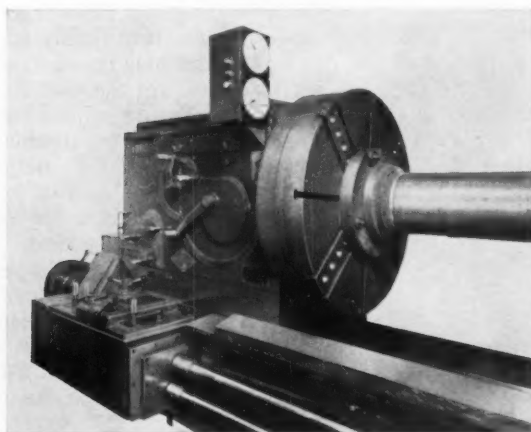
Headstock of Niles A-50 lathe announced by Baldwin-Lima-Hamilton Corporation
